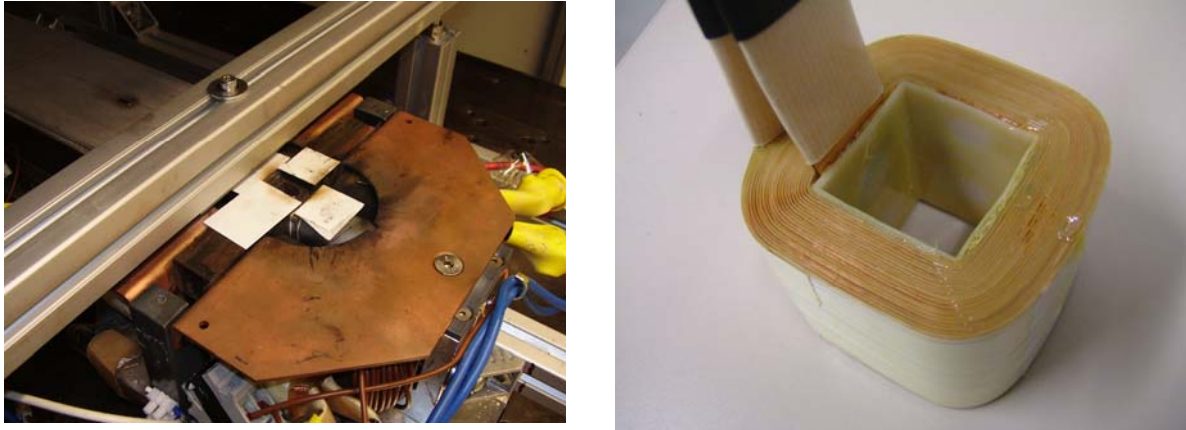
Left: AC electromagnet for electromagnetic weld-pool support for overhead welding of stainless steel plates. The magnetic field within the workpiece can reach up to 0.4 T at frequencies of about 4 kHz; dimensions: 200 x 230 x 90 mm³, weight: approx. 20 kg, the magnet cores and poles are made from 0.05 mm thick Fe-Si alloy (microsil) band. The magnet poles width is 25 mm and the gap between the poles is 20 mm.
